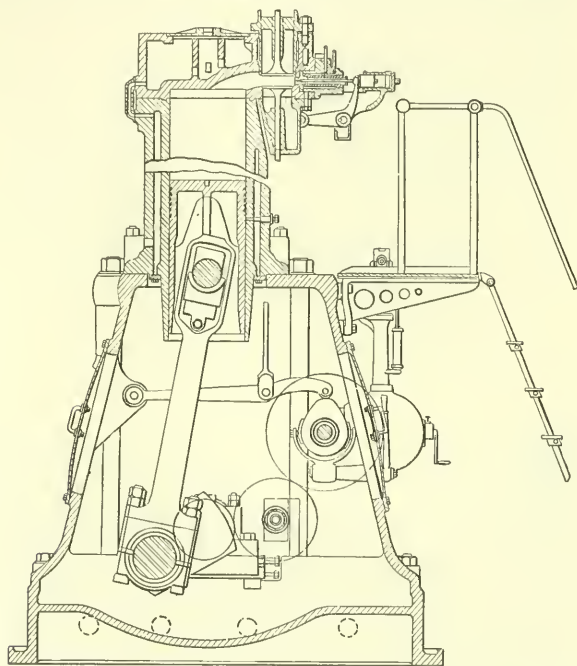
SECTIONAL DRAWING OF THE AMERICAN DIESEL ENGINE
